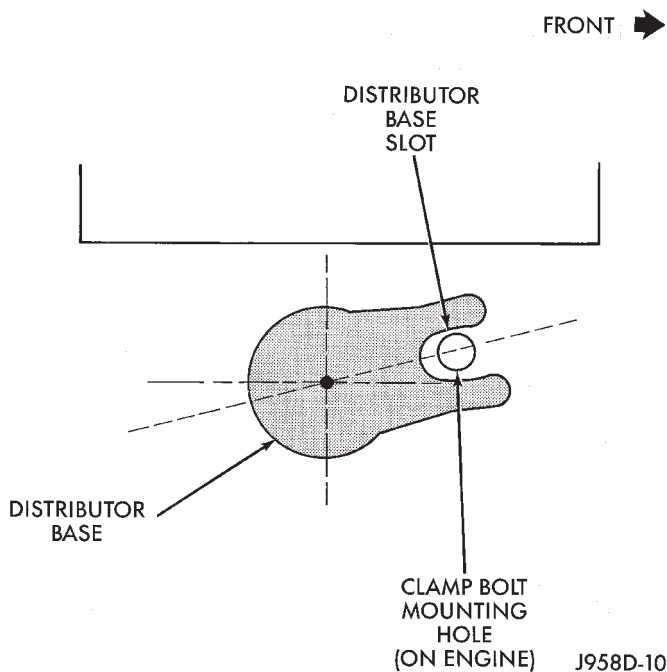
Distributor Engaged Position—4.0L 6-Cylinder Engine
